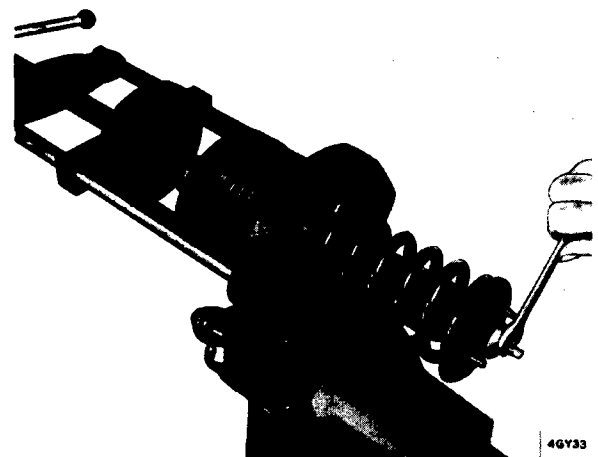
Using press S.4221A with adaptor S.4221A-5 to compress the front road spring
